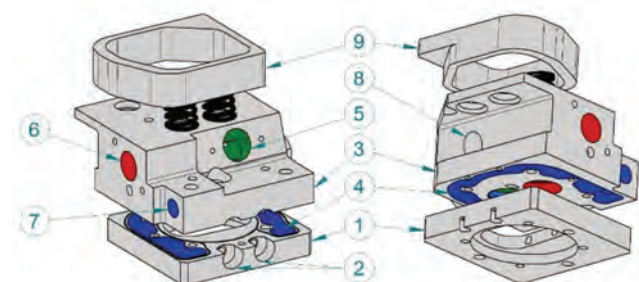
Prototype cylinder head: 1 – lower part with combustion chamber and water jacket, 2 – injector seats, 3 – middle part, 4 – water jacket, 5 – intake channel, 6 – exhaust channel, 7 – cooling system inlet, 8 – spark plug socket, 9 – upper part
